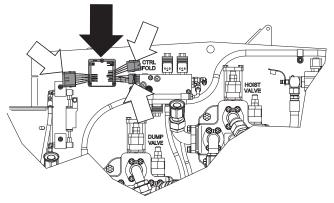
Hydraulic Fan Controller located on valve plate behind cab
